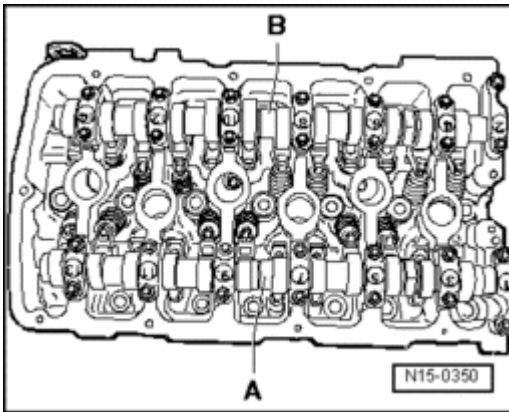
Identifying Intake Camshaft And Exhaust Camshaft
